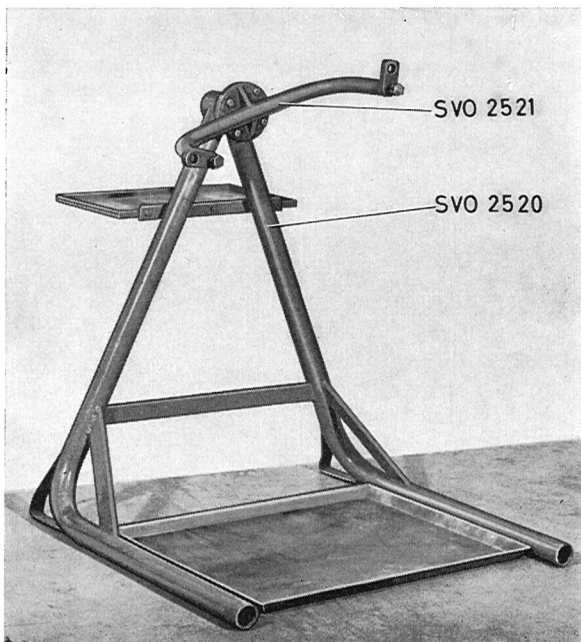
Stand 2520 and fixture 2521 for engine
